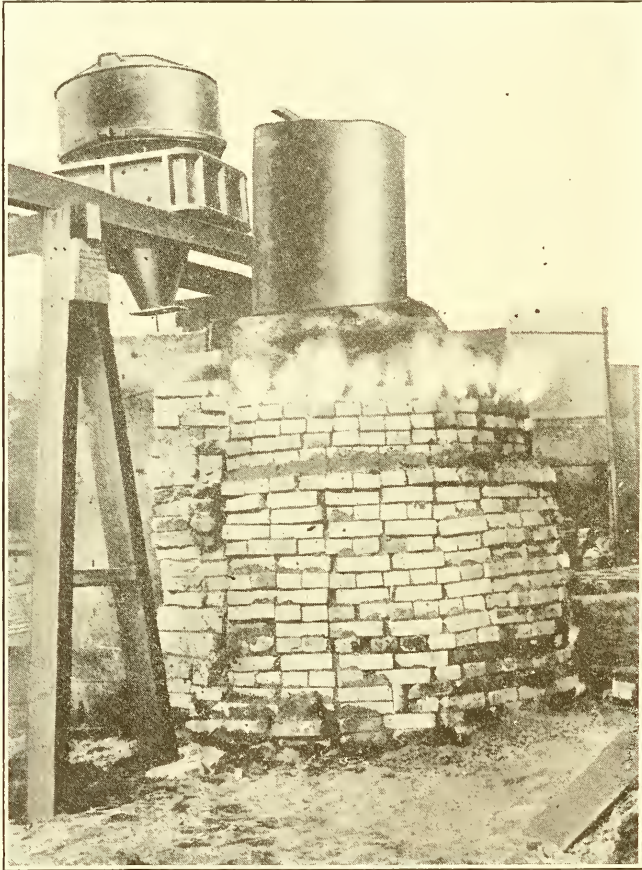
Rear View Showing Preheating of Body of Pinion in Brick Furnace.
